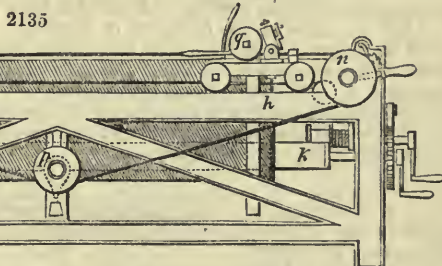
is an end view, and *fig.* 2135 is a side view, of Lewis's machine for shearing cloth from list to list. *Fig.* 2136 is an end view of the carriage, with the rotatory cutter detached from the frame of the machine, and upon a larger scale: a is a cylinder of metal, on which is fixed a triangular steel wire; this wire is previously bent round the cylinder in the form of a screw, as represented at a , a , in *fig.* 2134, and, being hardened, is intended to constitute one edge of the shear or cutter.
